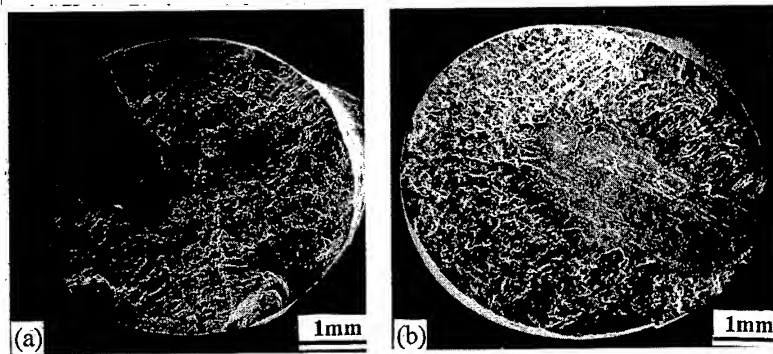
Typical fracture surface of alloy K403 fractured at 750 °C, 645MPa: (a) dendritic fracture surface of specimen heat-treated by 1210 °C/4h, having 13.2h life; (b) facet fracture surface of specimen heat-treated by 1180 °C/4h+900 °C/16h, having 211.5h life.
